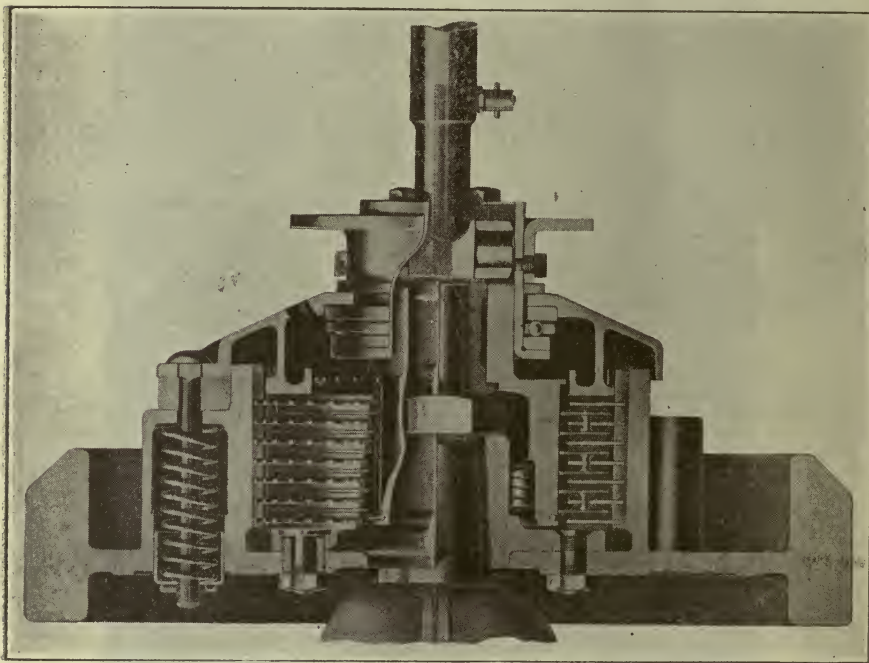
Reo Passenger Car Multiple Disk Clutch.
